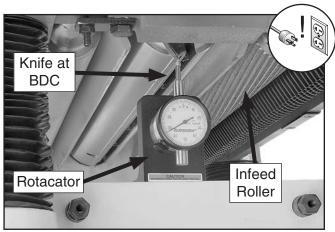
Example of using a Rotacator to find BDC (viewed from left side of machine).
